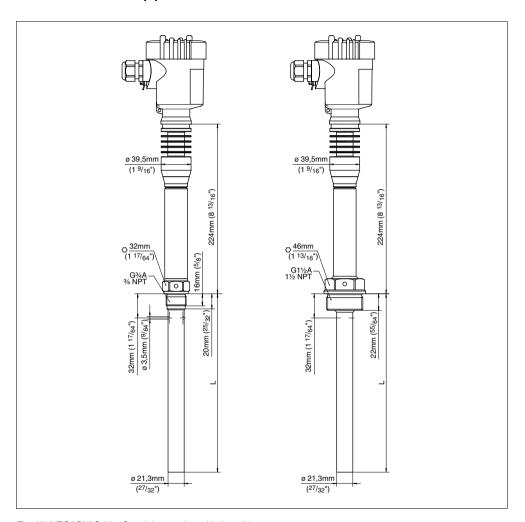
VEGAPULS 62 - Standpipe version with thread 17)
